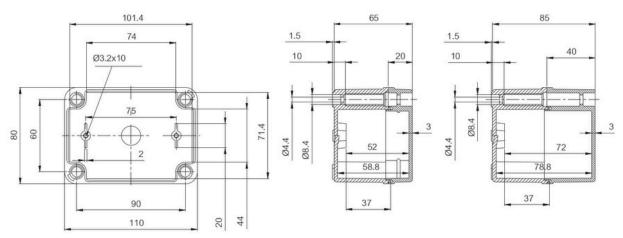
Housing dimensions (in mm). Note: Drawing not including cable gland and sensor.
